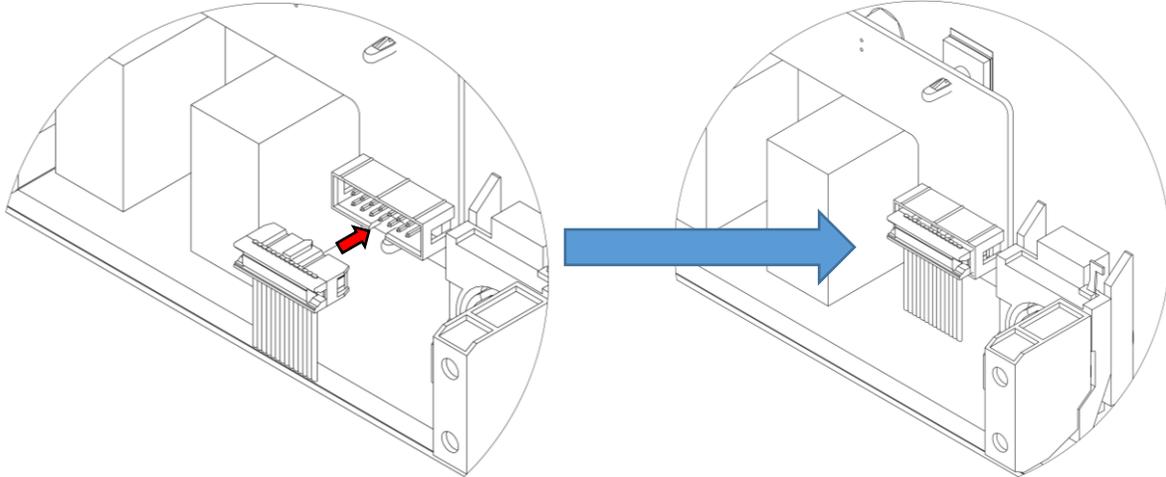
Attaching the Ribbon Cable from the FLA Daughterboard to the FLA Motherboard
